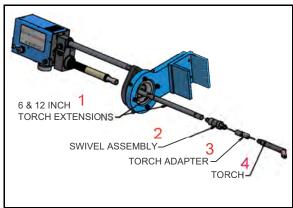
TORCH EXTENSION ASSEMBLY
